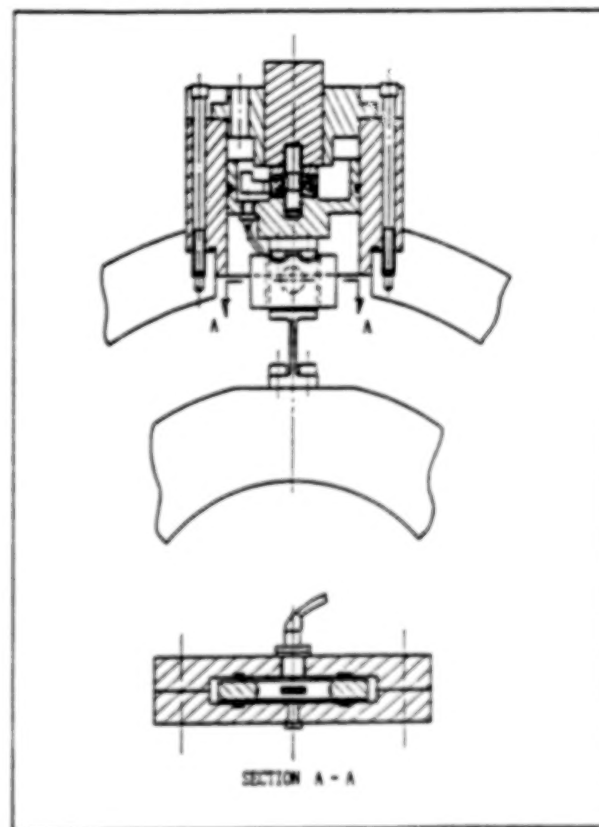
New load measuring system, showing complete assembly with water-seal barrier.
